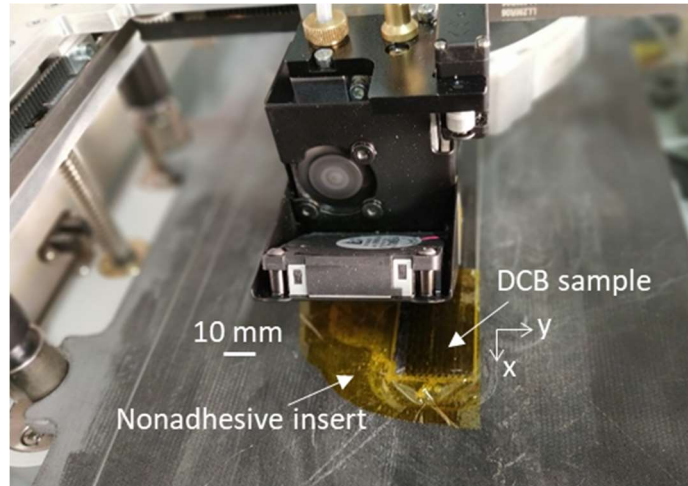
3D printing of DCB samples, with the addition of the nonadhesive insert.
